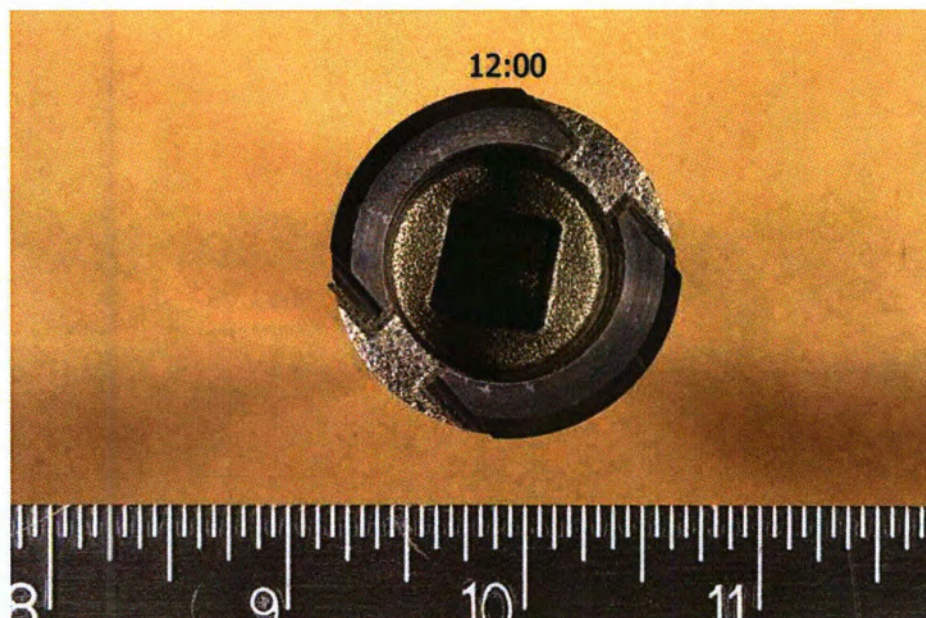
Bolt 300-1 showing plunge cut EDM surface, which removed much of the in-service cracking. Thickness measurements taken around the circumference indicated the EDM was skewed slightly toward the 270° direction (i.e. to the left in photo).
